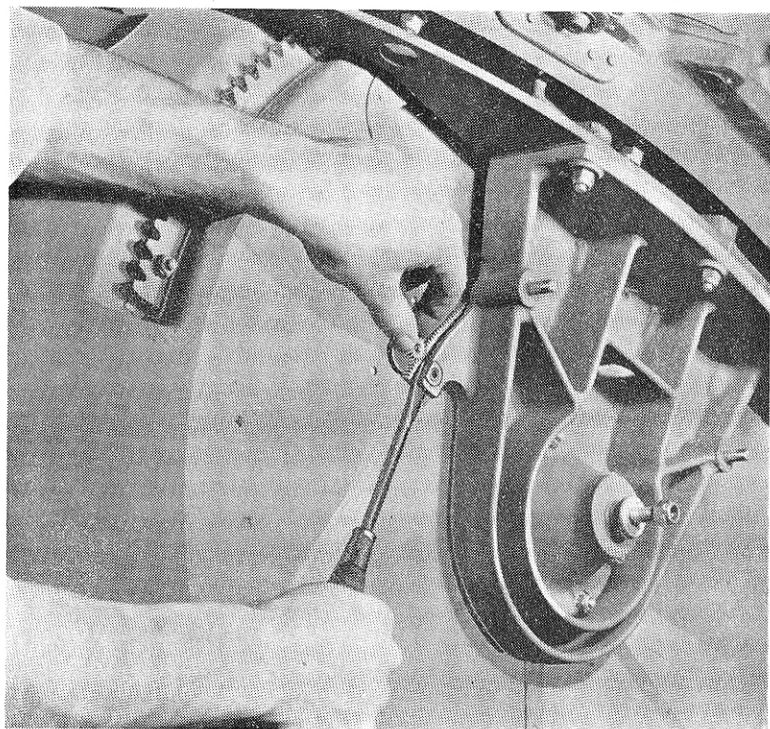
Adjusting Elevation Limit Stop Gearing
